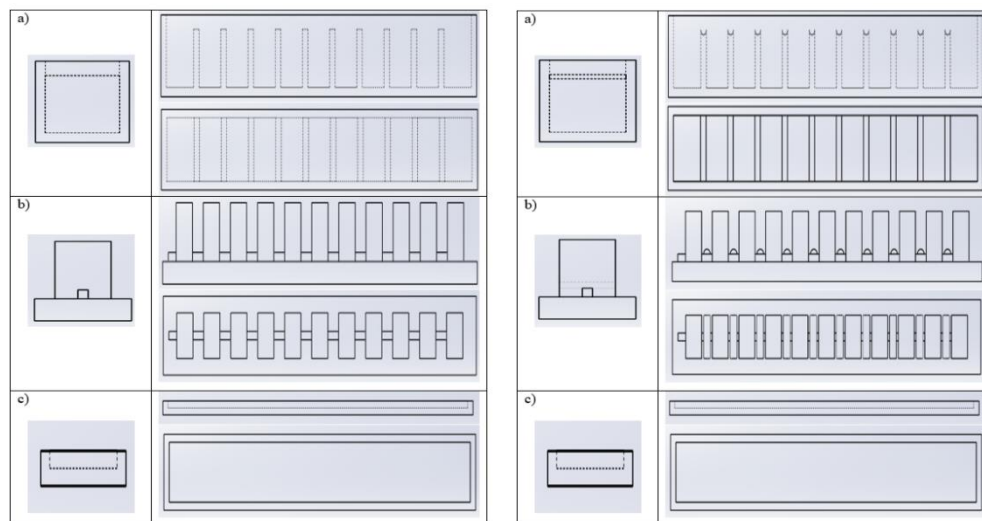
Conventional SPA Moulds (left) and Improved SPA Moulds (Right)
